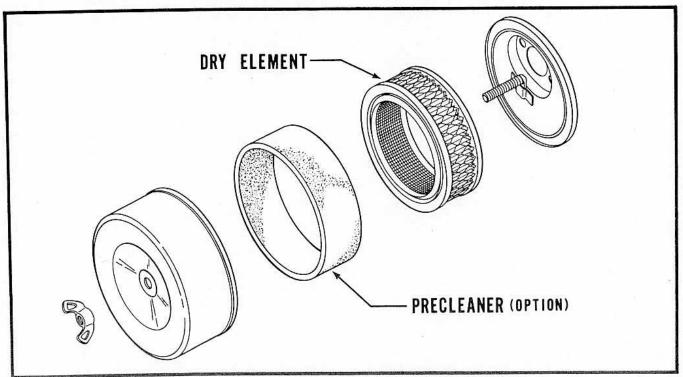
DRY TYPE AIR CLEANER WITH OPTIONAL PRECLEANER
